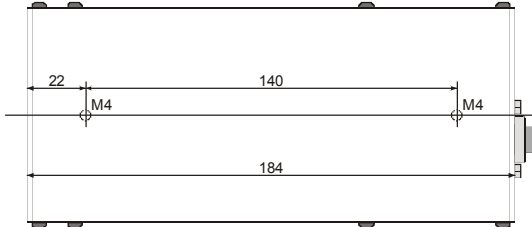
mechanical dimensions (mounting plane) of the MTE LTDB; all measures in mm
